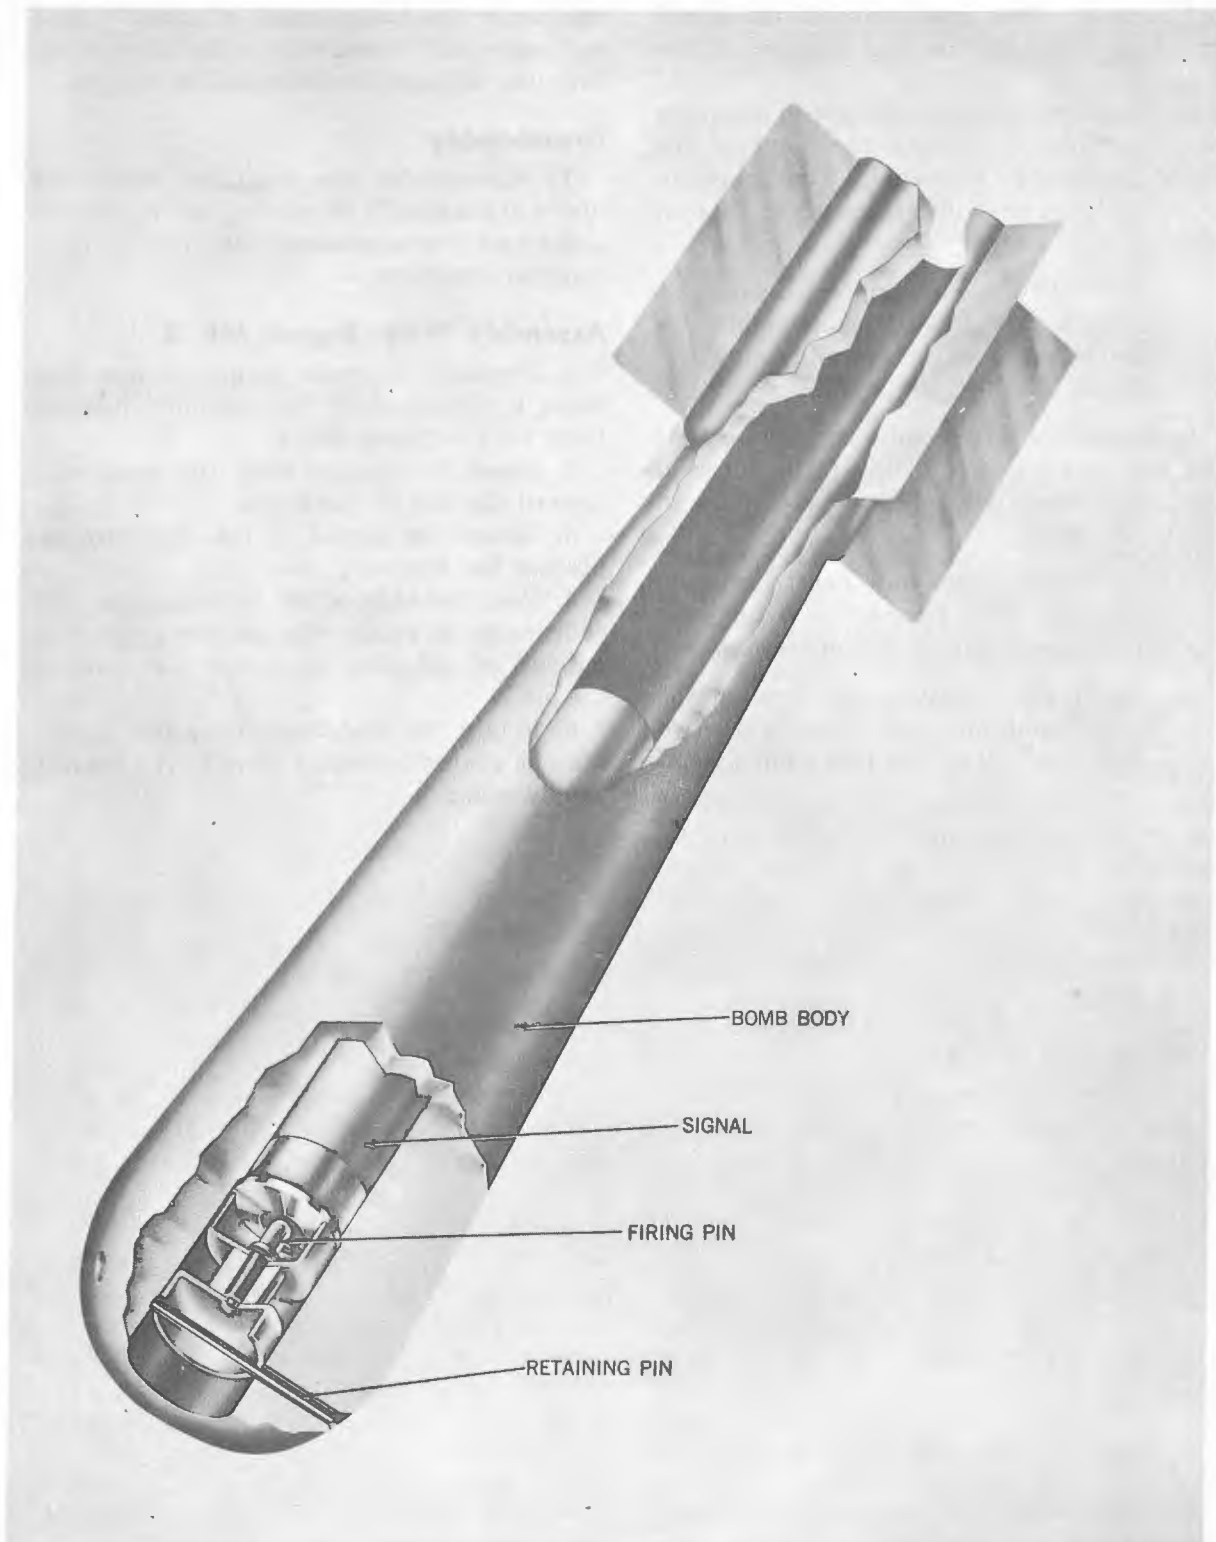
13-lb Miniature Practice Bomb Mk 19 Mod 1, Cutaway View.
